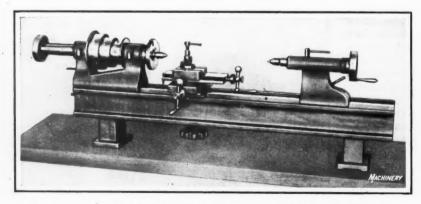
Rivett Bench Lathe which may be equipped with Attachments for performing a Variety of Operations
